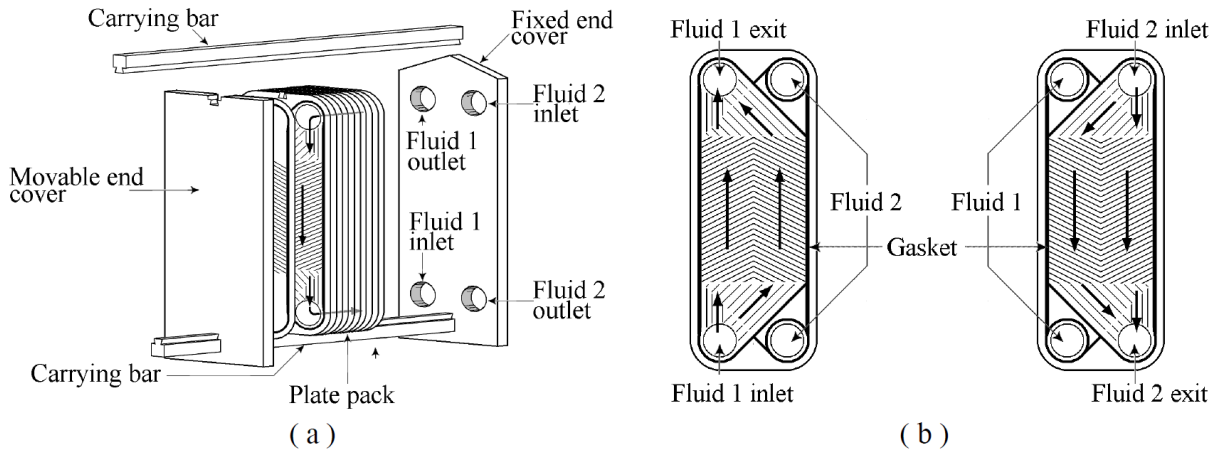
Gasketed PHE: (a) assembly; (b) individual plates [22].
